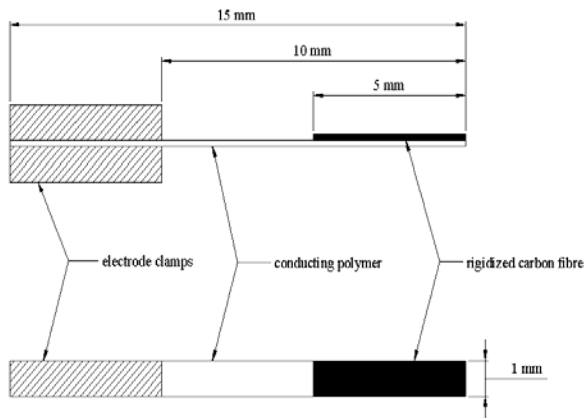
Structure and dimensions of the robotic finger (front view and top view).
